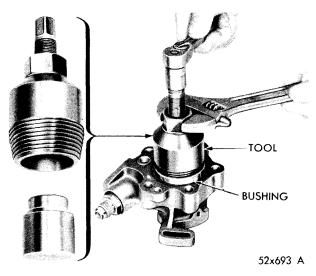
Removing Babbitt Bushing from Body (Tools C-3214 and C-3234)
